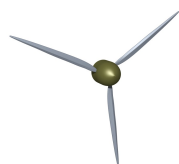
Side View of CAD Drawing of Cruise Propeller.
